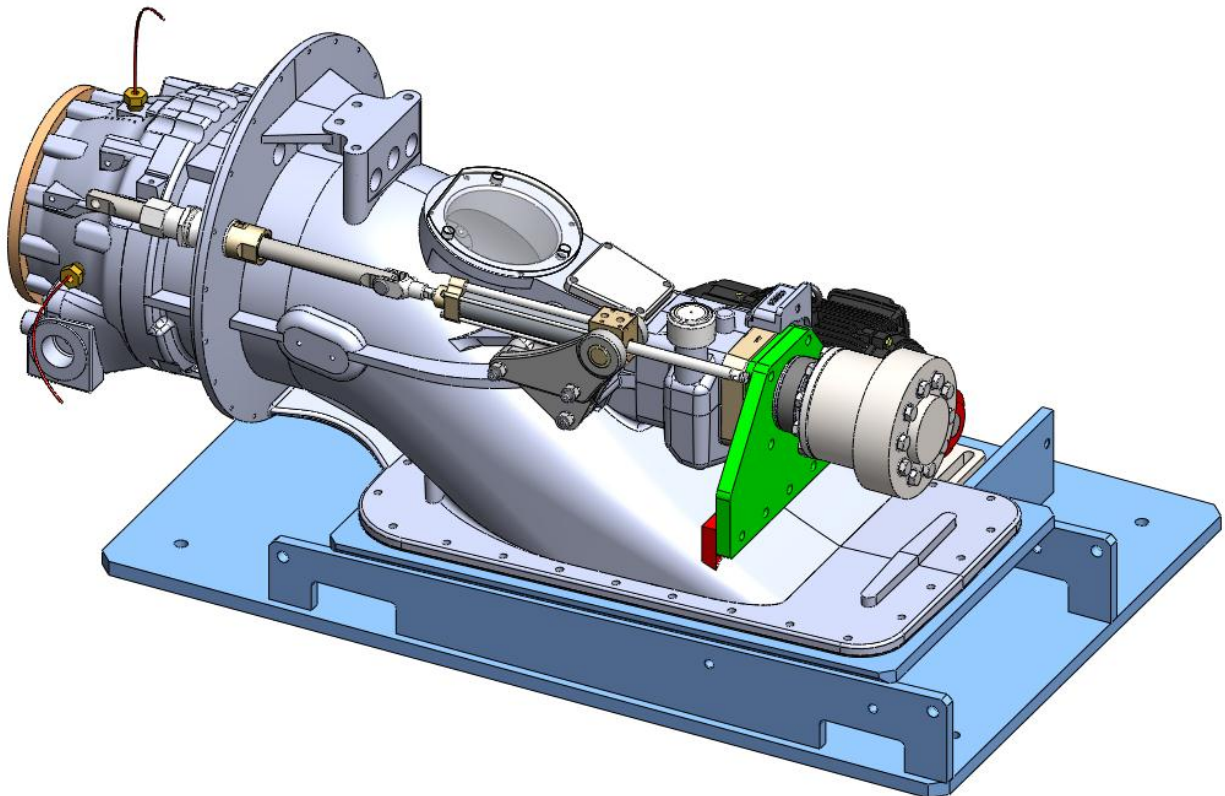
Final Design of Housing Stiffener Plate Attached to the Test Rig.
